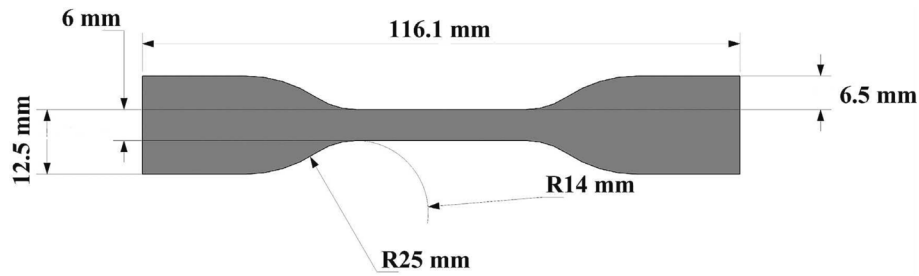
Geometric dimensions of the standard uniaxial tensile test specimen.
